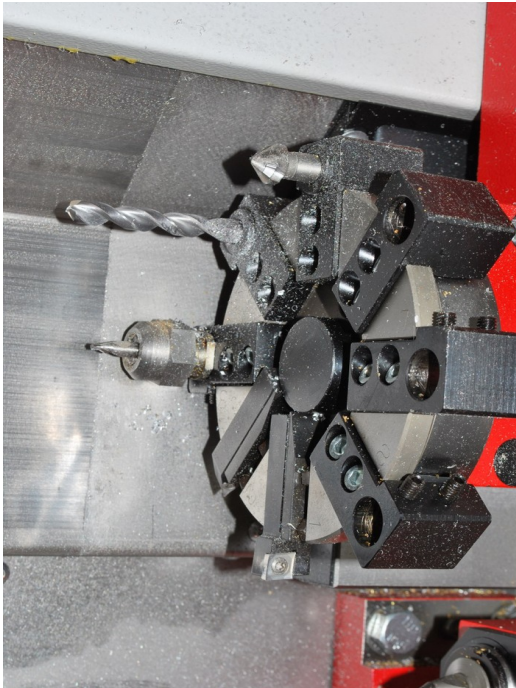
The lathe machine tool's tool holder equipped by cutting tools
